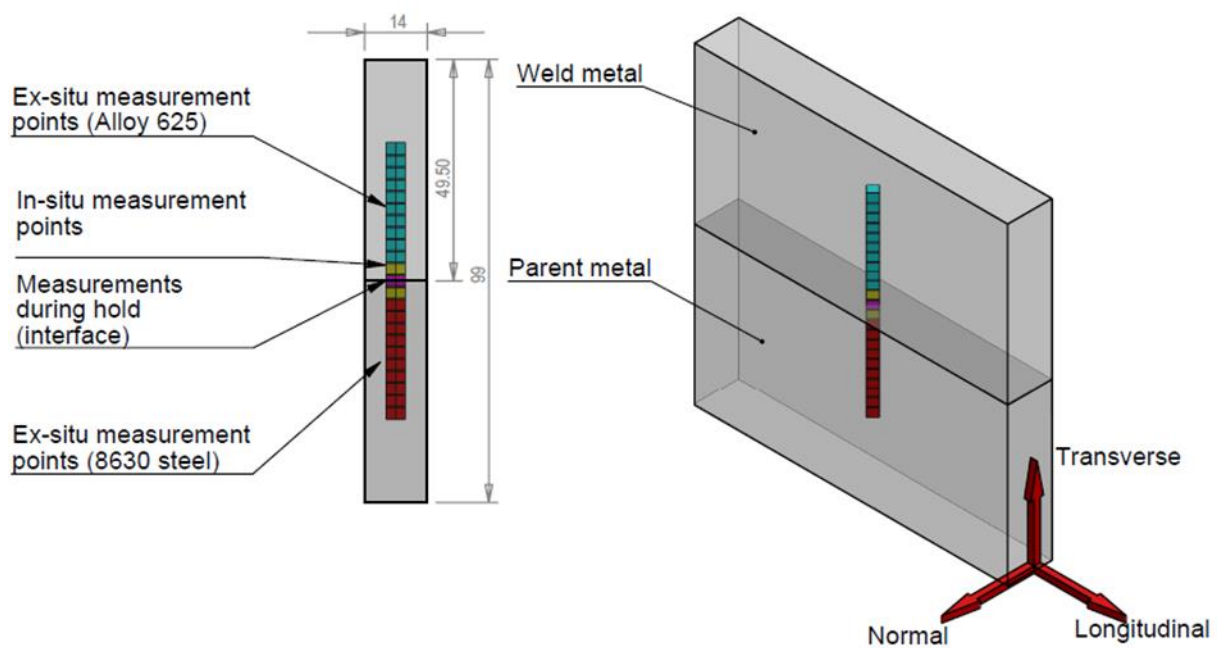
Sample geometry and measurement points. Plates were welded in the longitudinal direction
